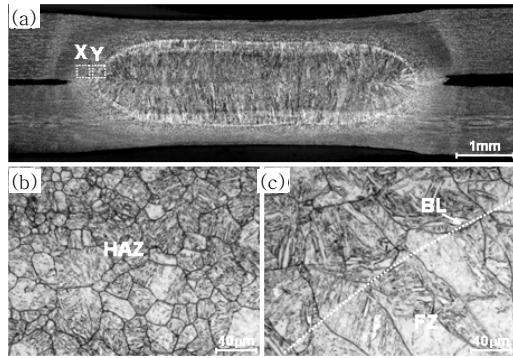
Typical optical micrographs of spot welds in Si0.5% [Welding Condition : 7.4kA]. (a) cross-section of spot welds, (b) X in (a), (c) Y in (a)
